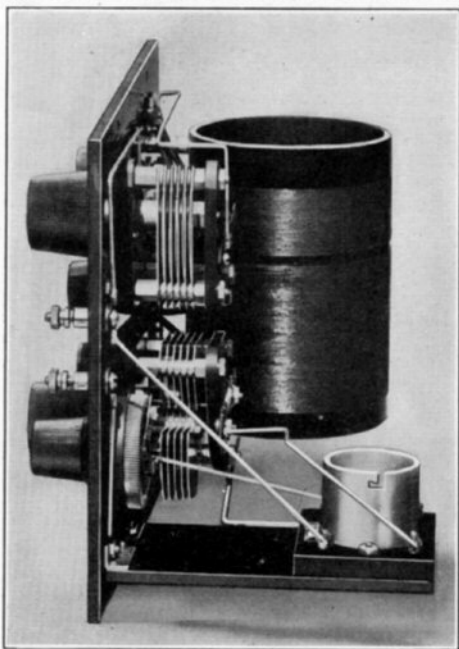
A side view, giving the details of construction. Note the socket panel and condenser mountings
